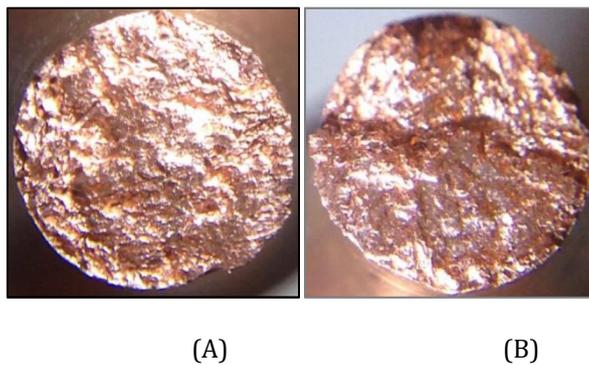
Copper A-Surface fracture for (Reversed bending) fatigue, B-Surface fracture for (bending with torsion) fatigue
